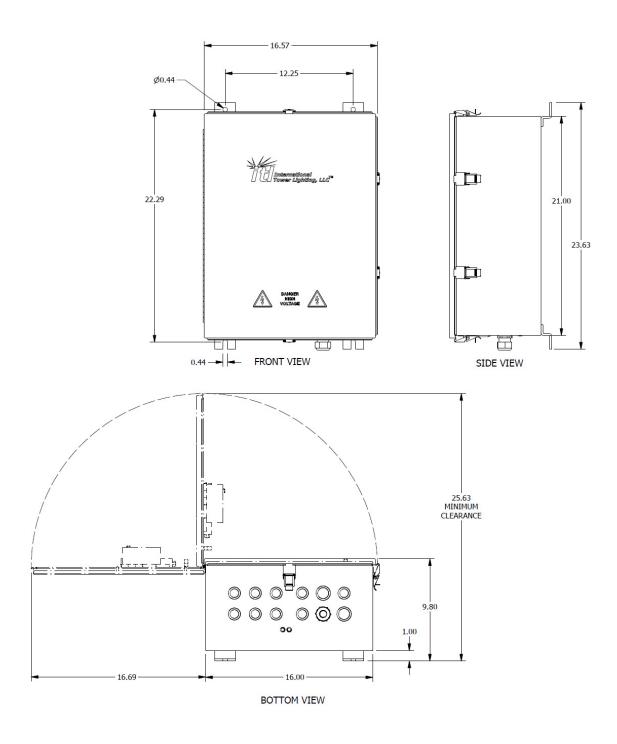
IPS-3400 Power Supply Dimensions and Mounting Details
